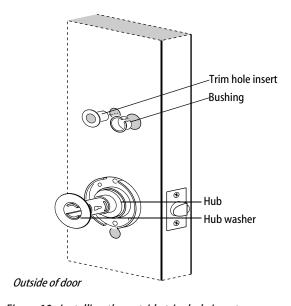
Installing the outside trim hole insert, bushing, and hub washer
